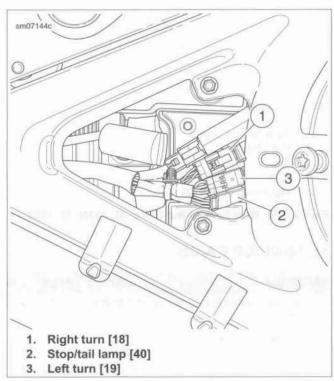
Rear Lighting Connectors: XL 1200C/CP/CA/CB
